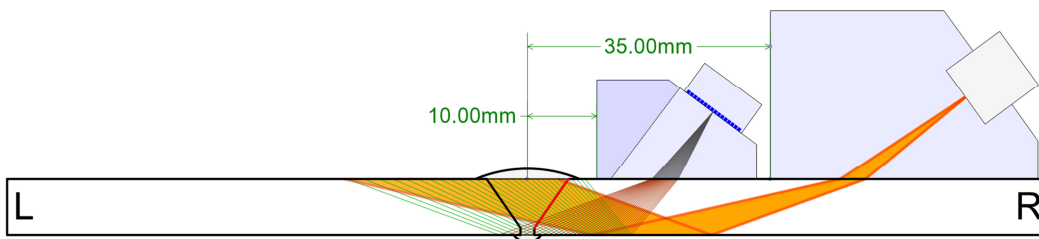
The lack of side-wall fusion on the right side of welded joint R (B)
